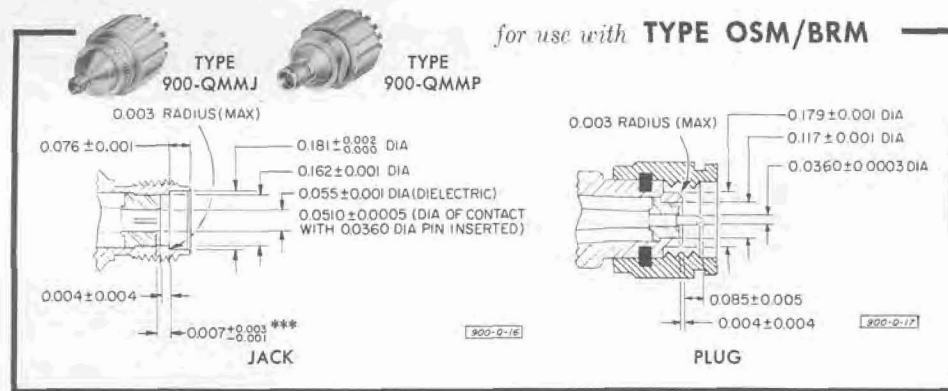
Critical mating dimensions of low-VSWR connectors used with the GR900 Connector on the precision adaptors. (All dimensions are in inches.)
